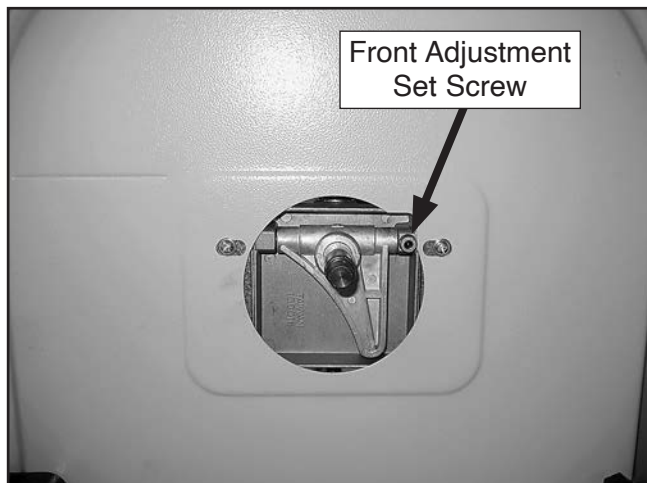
Front lateral adjustment set screw (viewed with the upper wheel removed).
